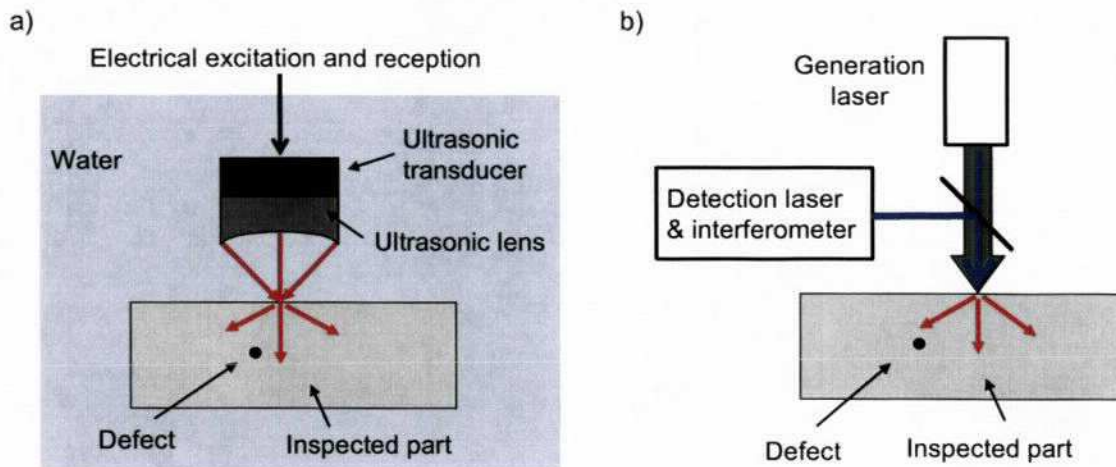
Measurement setups that can be used for inspection of FSW with SAFT. a) Immersion technique and b) laser-ultrasonics.
